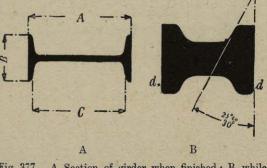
A, Section of girder when finished; B, while being roughed out.
